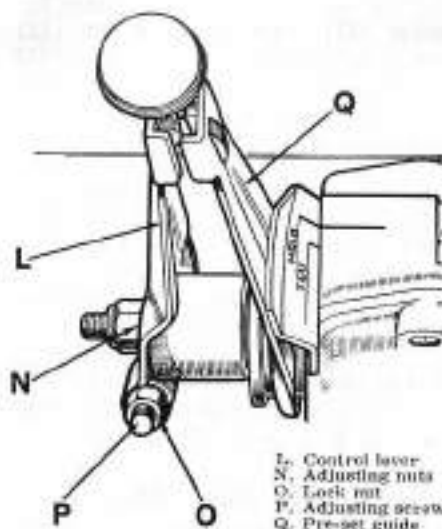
Adjusting control lever tension nuts (N) and push rod screw (P); refer to text for procedure.
